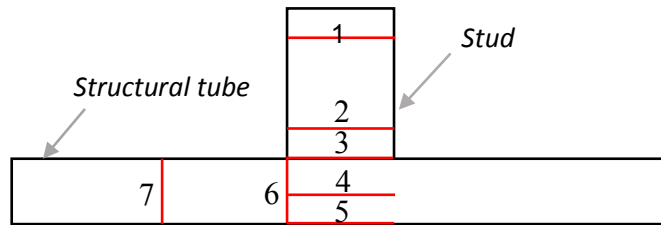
Sketch of the welding joint. From 1 to 7, positions of the extracted samples.
